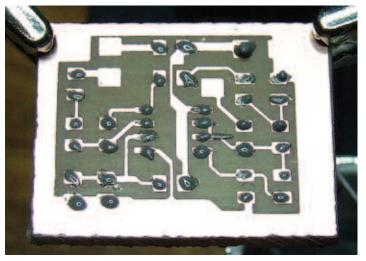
Blobs of solder paste have been applied to the PCB pads using a cocktail stick.
